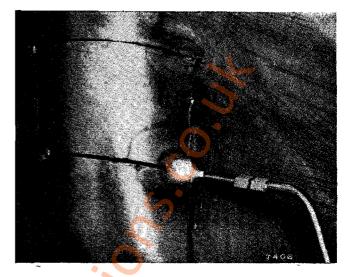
The formed patch held in position by gas-weld tacks
